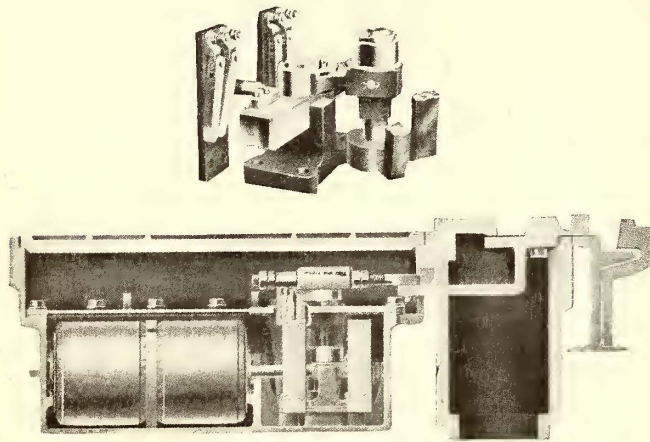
DETAILS OF CROSSING—DERAIL-THROWING MECHANISM
